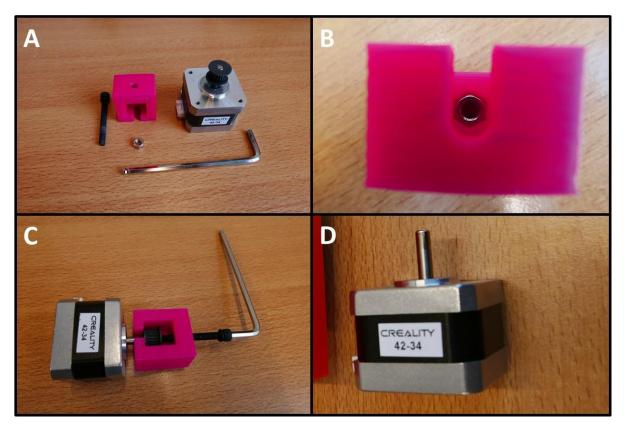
Stepper pulley removal process. A) Overview of the tool, parts and stepper. B) Fitting the M5 nut in the tool. C) Removing the pulley with the tool. D) Stepper motor ready for use in the pump.
